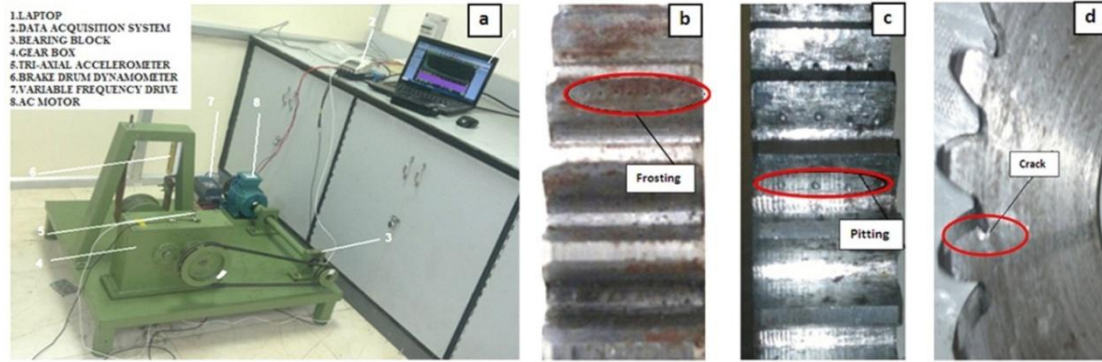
(a) Gear test rig (experimental set up) (b) frosting induced gear (c) pitting induced gear (d) crack induced gear
